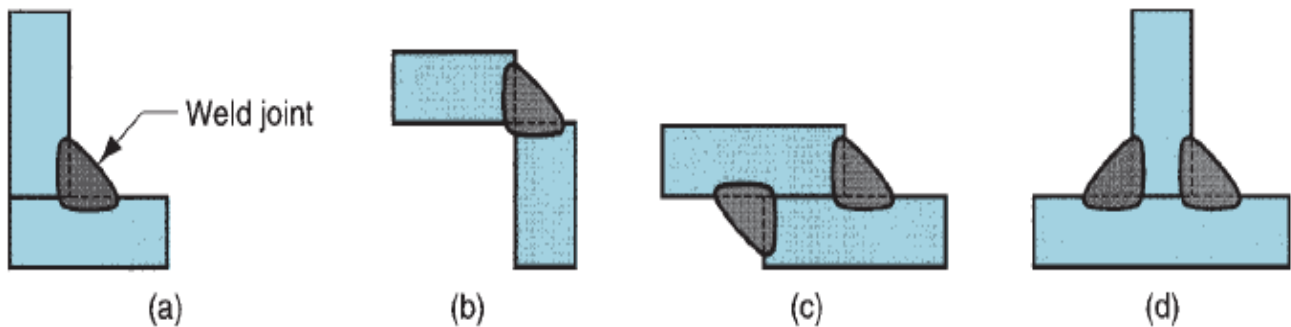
Various forms of fillet welds: (a) inside single fillet corner joint (b) outside single fillet corner joint (c) double fillet lap joint (d) double fillet tee joint. Dashed lines show the original part edges.
